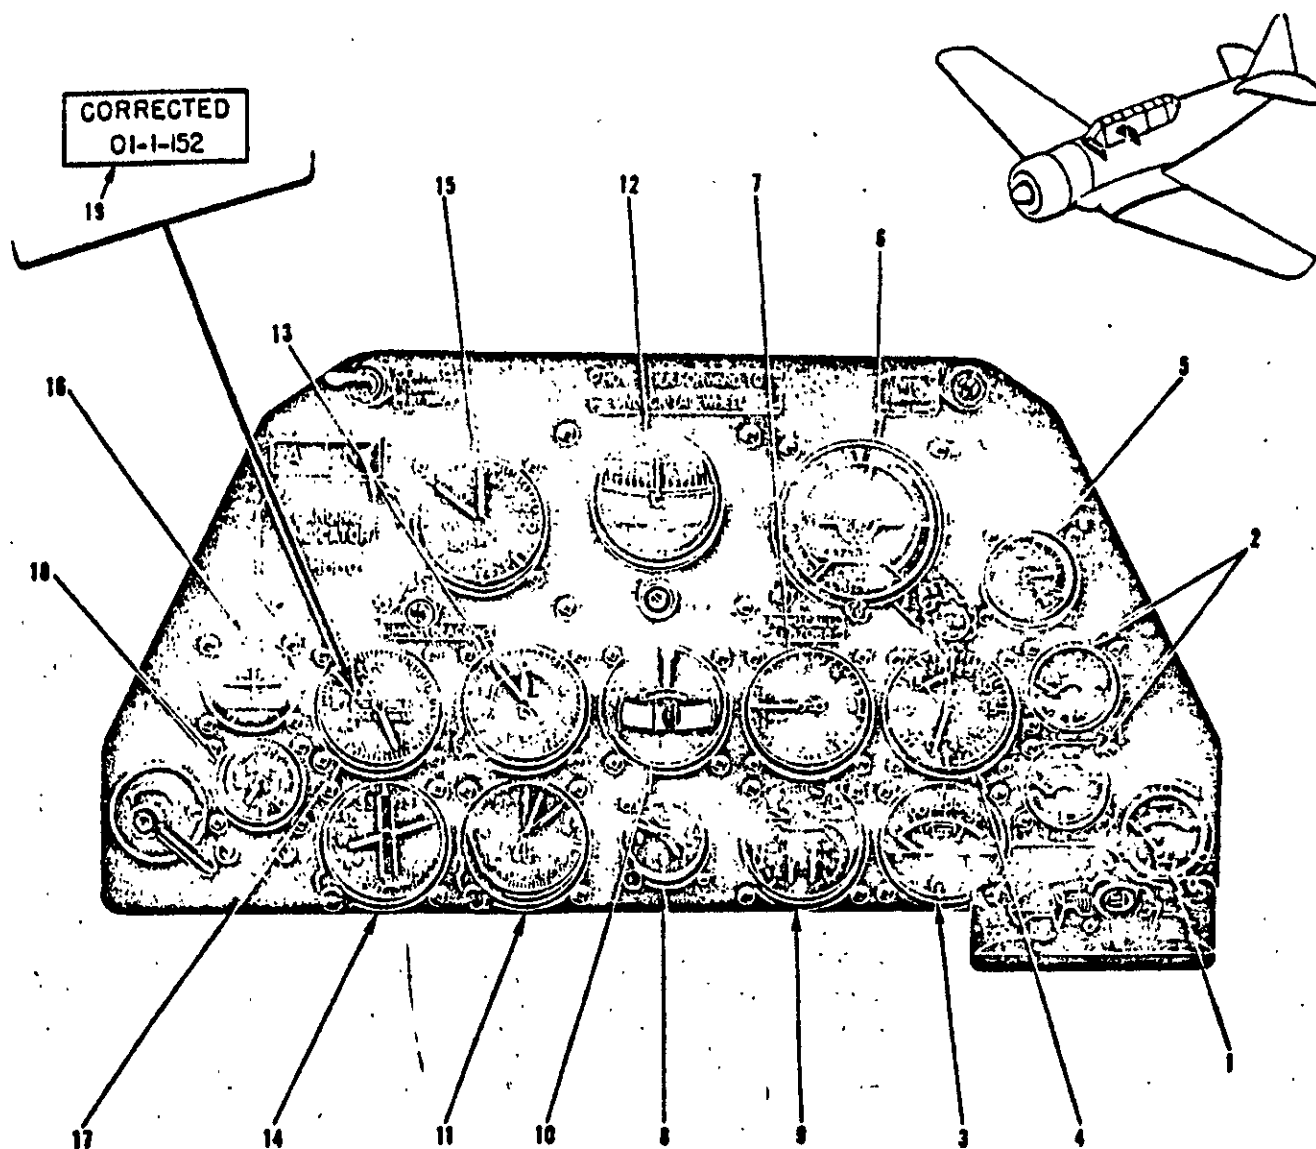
COMPLETE INSTRUMENT PANEL ASSEMBLY
